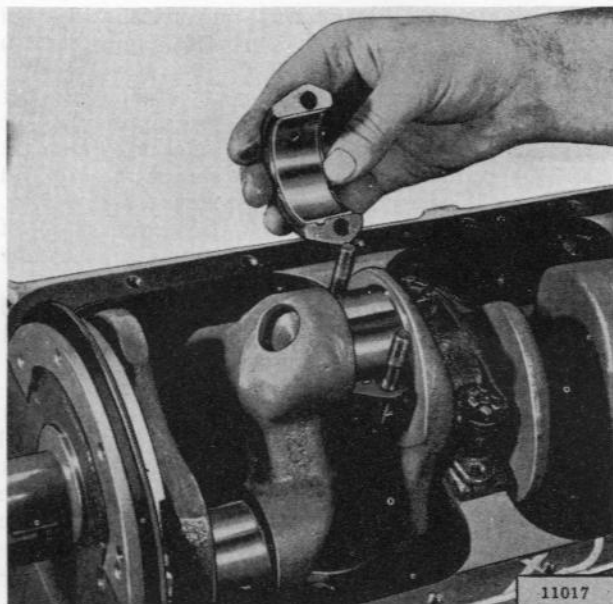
INSTALLING CONNECTING ROD BEARING CAP
